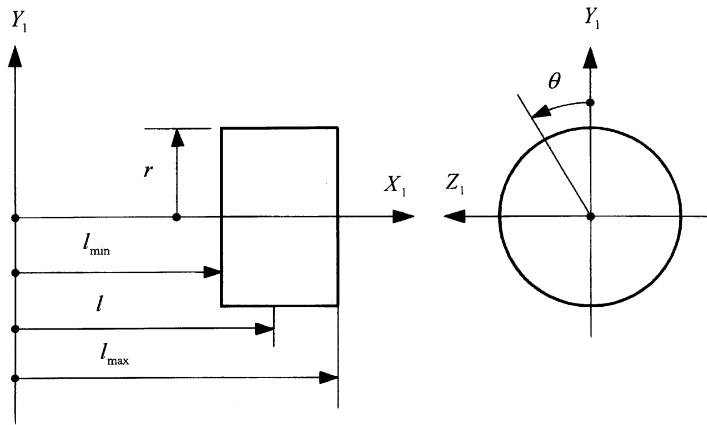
Coordinate system and design parameters of the roller-type cutter.
